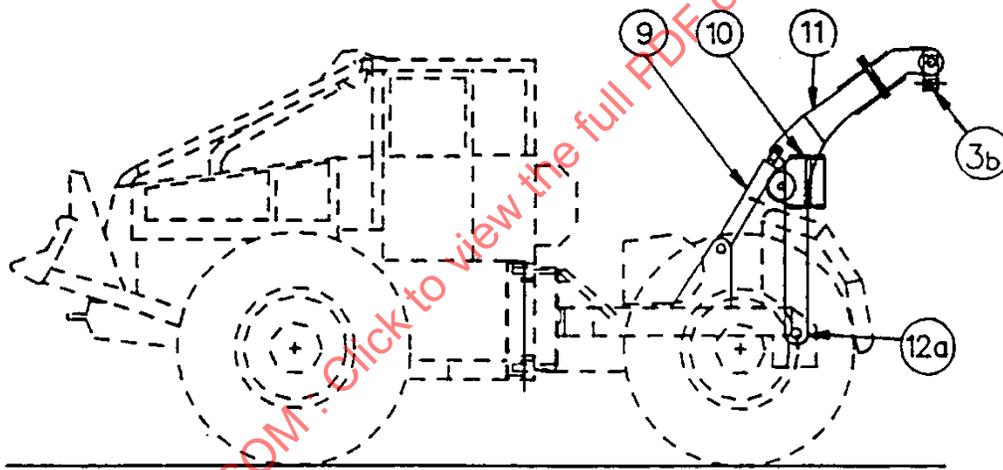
SINGLE FUNCTION BOOM ASSEMBLY—LOG BUMPER MOUNTED
